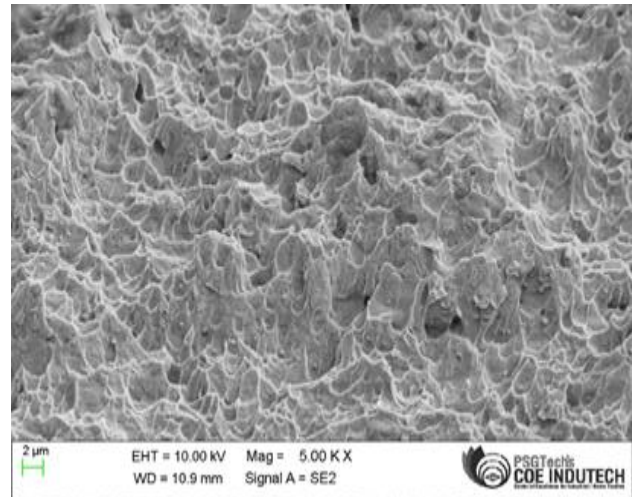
Scanning Electron Microscope image of fractured tensile tested specimen
